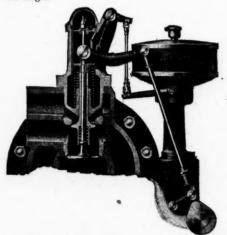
VARIABLE ADMISSION VALVE GEAR SECTION.
